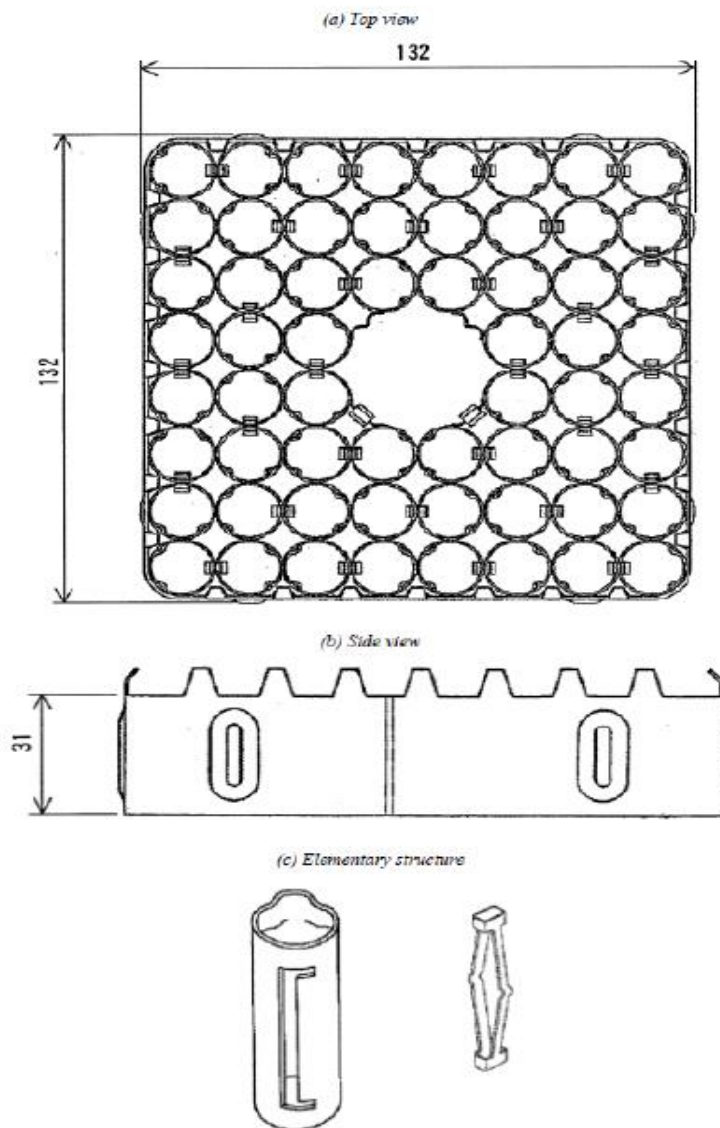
Dimensions of ferrule type grid spacer (mm)
